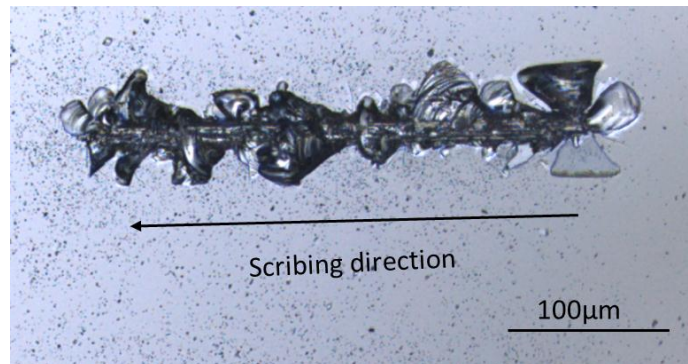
Single grit diamond scribing in the brittle fracture regime (4 μm nominal depth of cut).
